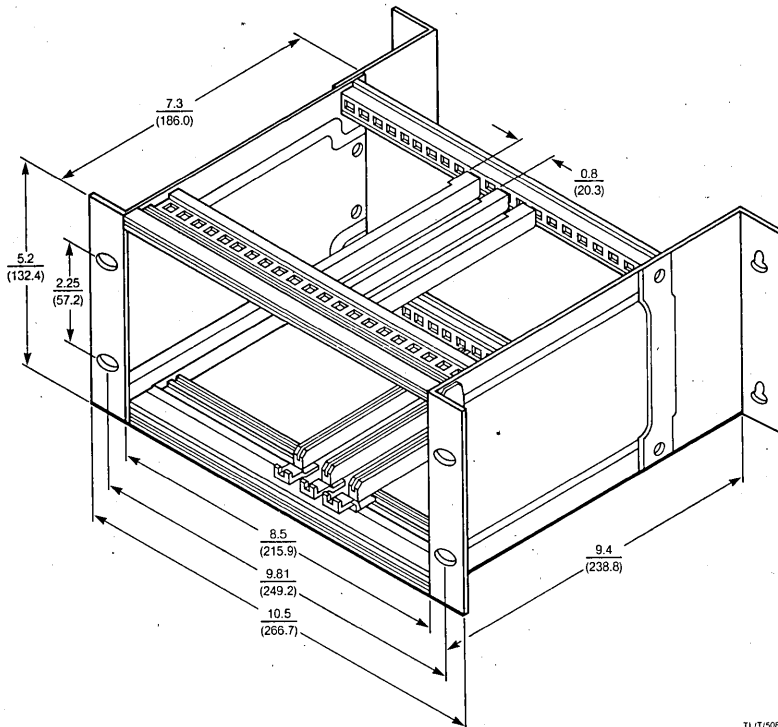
CIM-602 Card Cage Dimensions [inches/(millimeters)]
